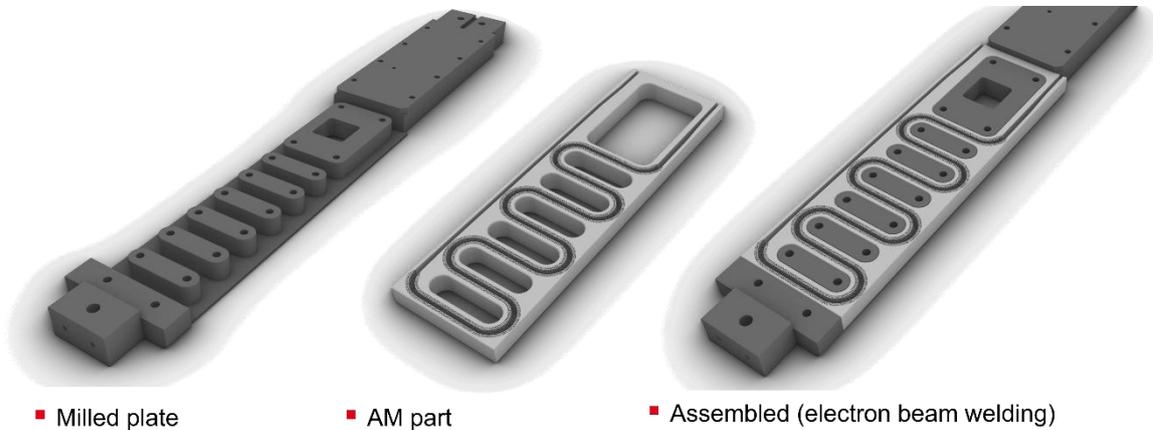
Design of hybrid manufactured BOX sample with the milled plate and the AM part that contains the channels.
